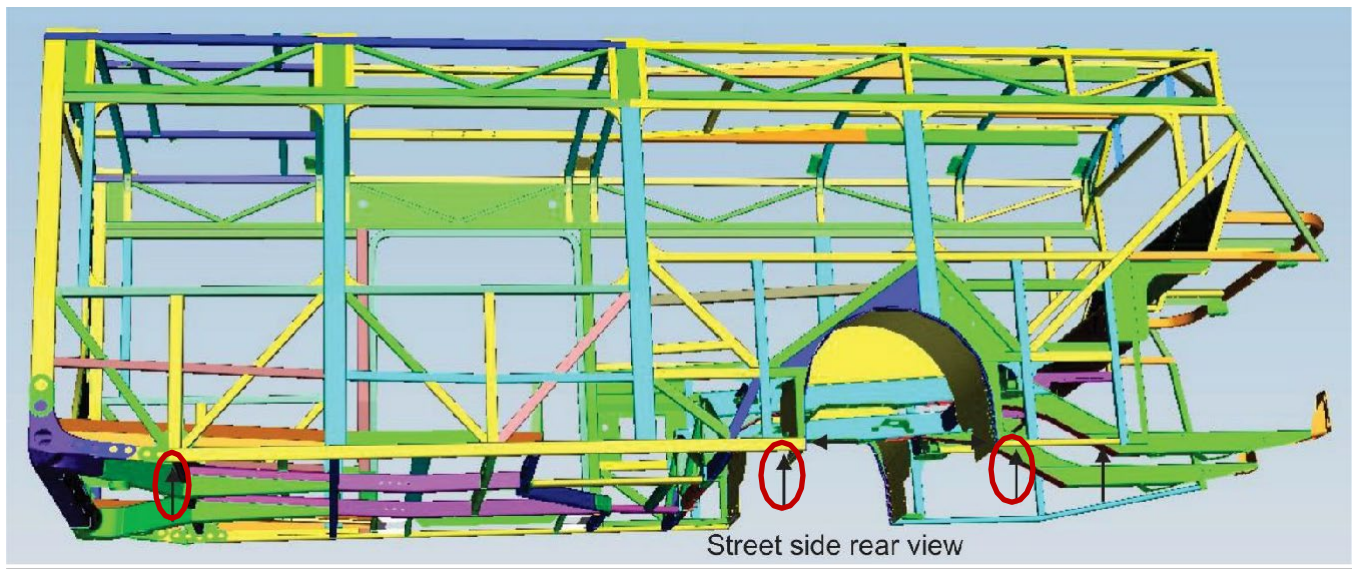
SHOWN TYPICAL HOLE LOCATIONS ON THE STREET SIDE & CURBSIDE ONLY HOLES BEING DRILLED ARE CIRCLED.
